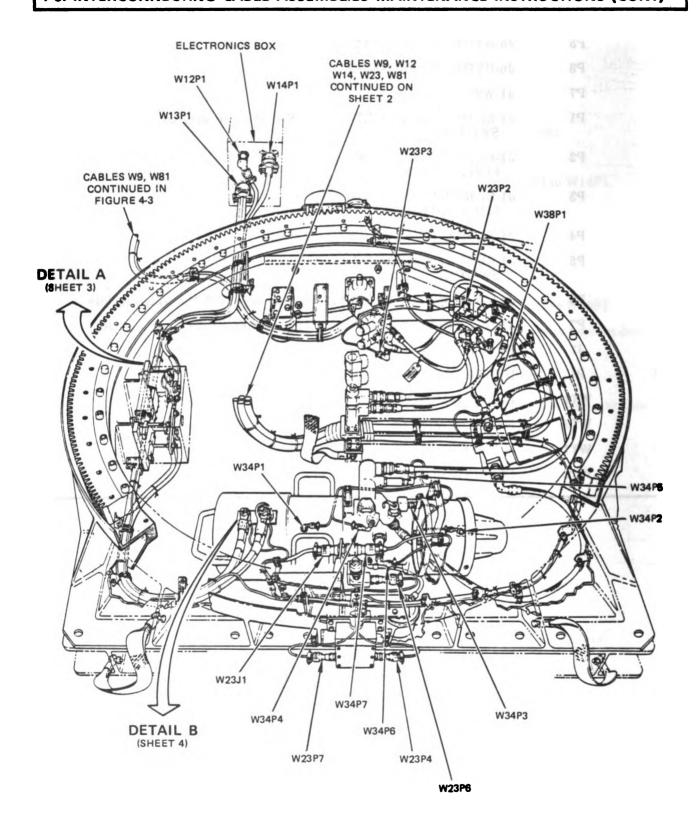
BaselTurret Interconnecting Cable Assemblies (Sheet 1 of 4)
